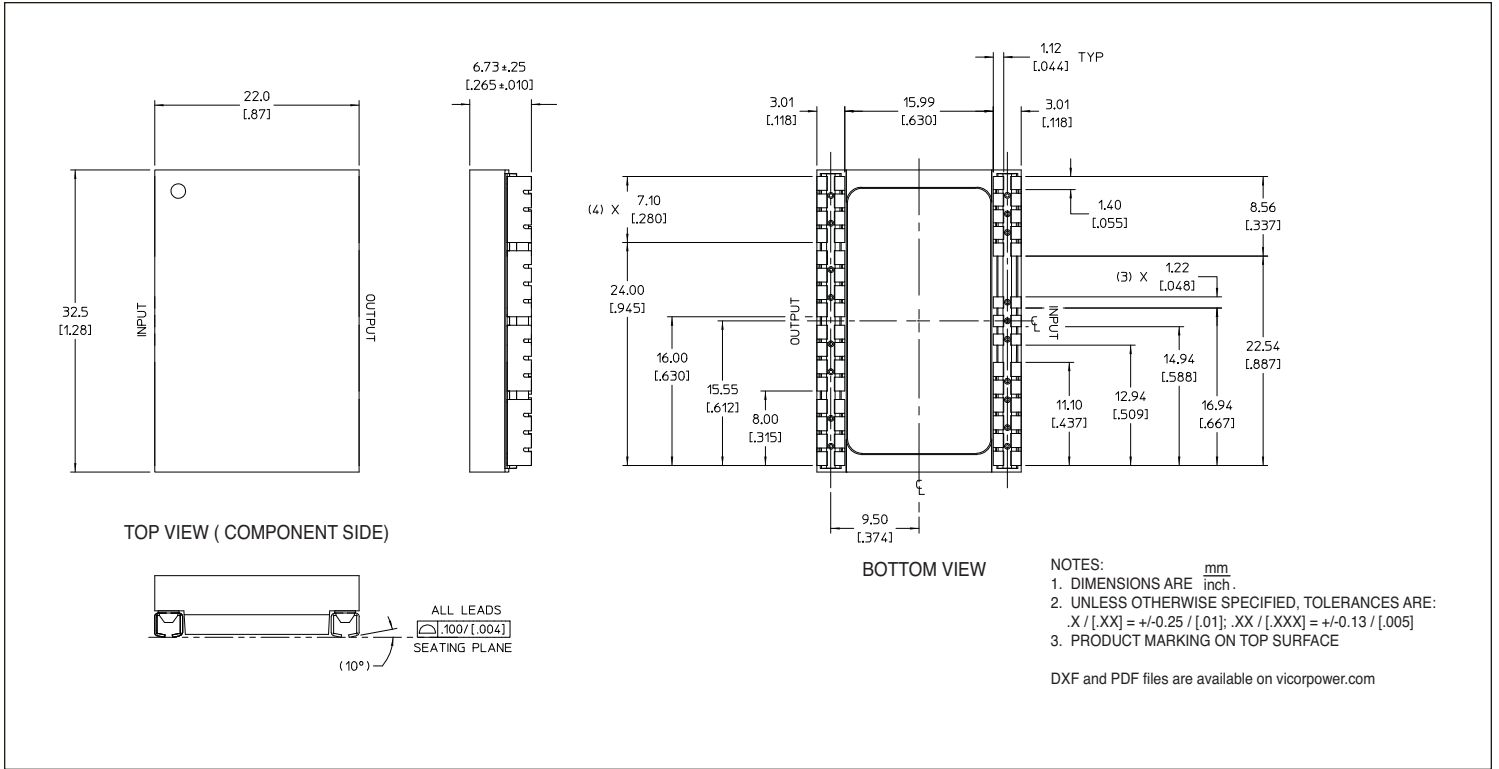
VTM J-Lead mechanical outline; Onboard mounting
